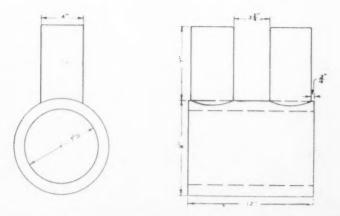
Sketch of Cylinder Casting Uniformly One Inch Thick Showing Risers.
